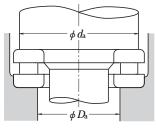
Face Supporting Diameters for Thrust Roller Bearings
